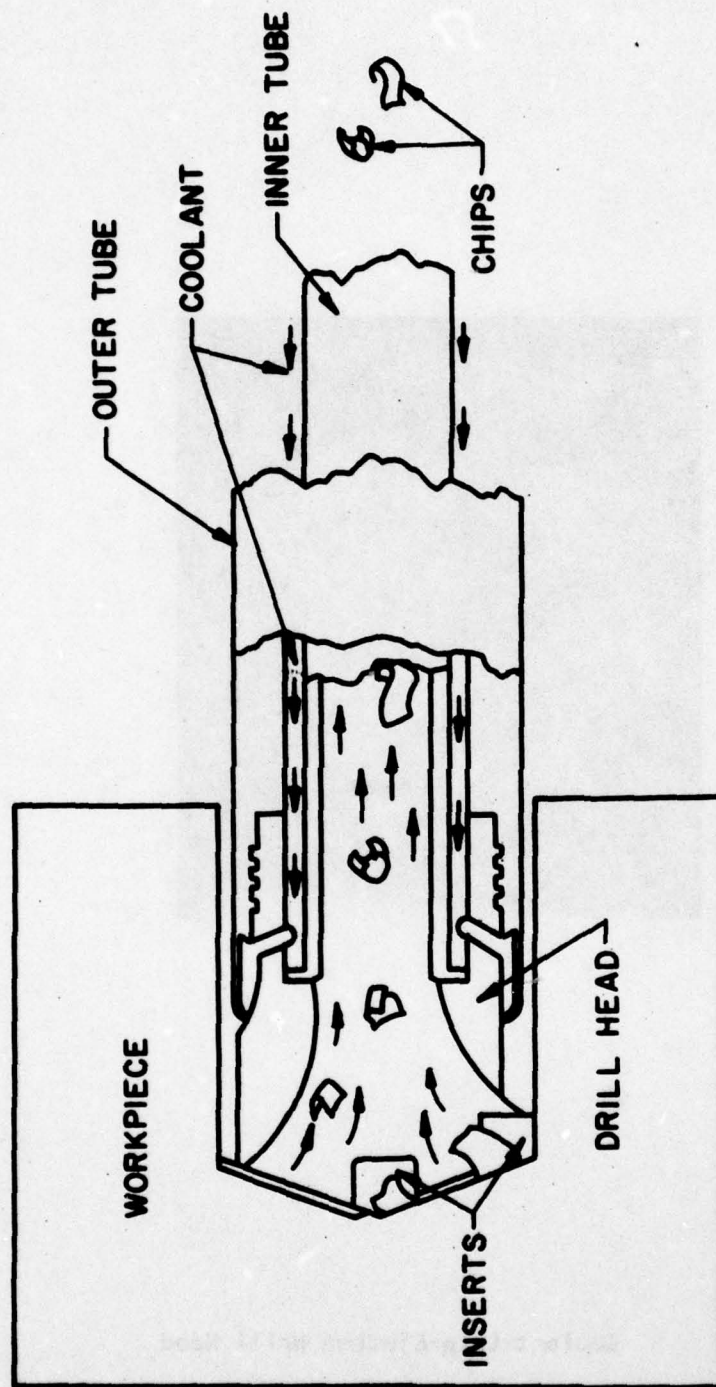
Schematic of Drill Head and Tubes in Workpiece.
